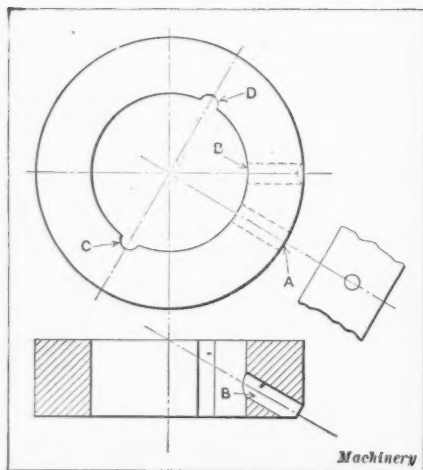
Master Gage for testing Gage shown in Fig. 4
